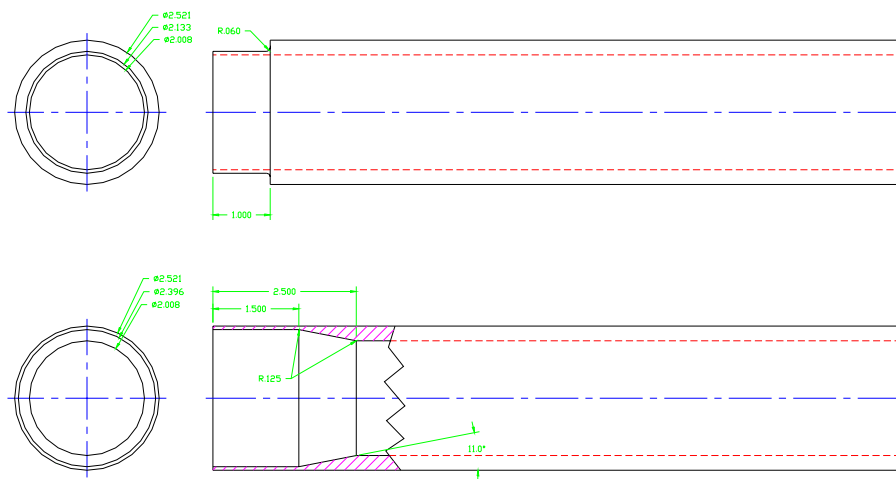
Sketch of Lap Joint Configuration for Magnetic Impulse Welding
